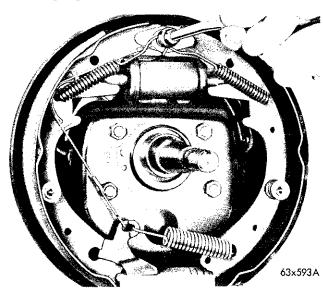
Removing or Installing the Brake Shoe Return Springs (Front)
